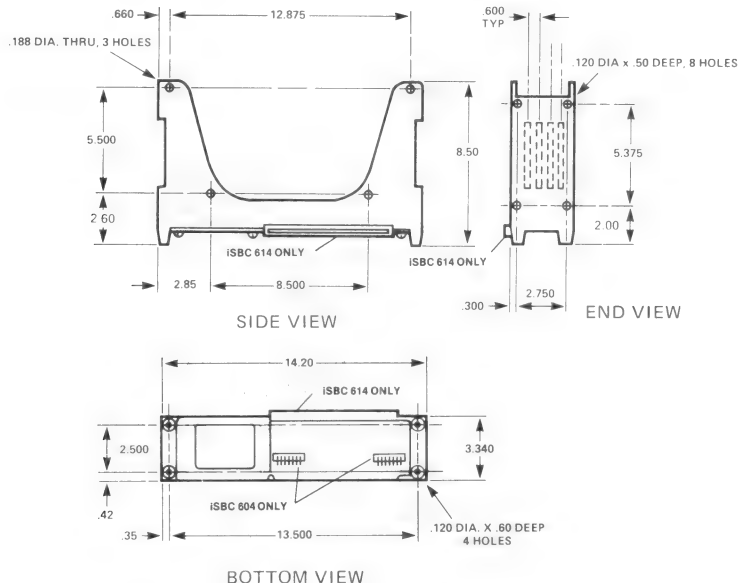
iSBC 604/614 Modular Backplane and Cardcage Dimensions
